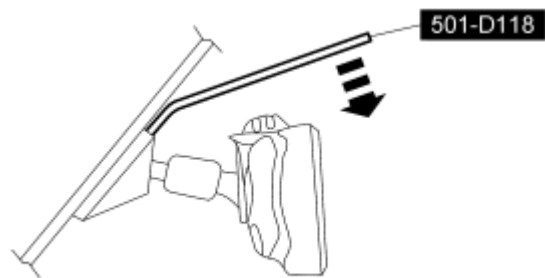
Exploded View Of Auto-Dimming Interior Mirror
